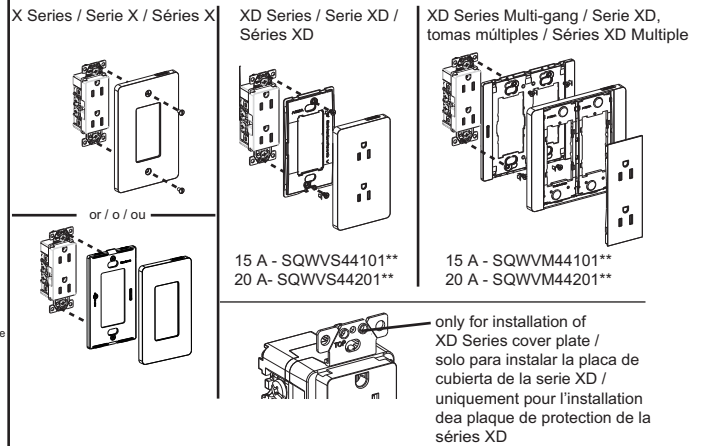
Wall Plate / Placa de pared / Plaque murale
